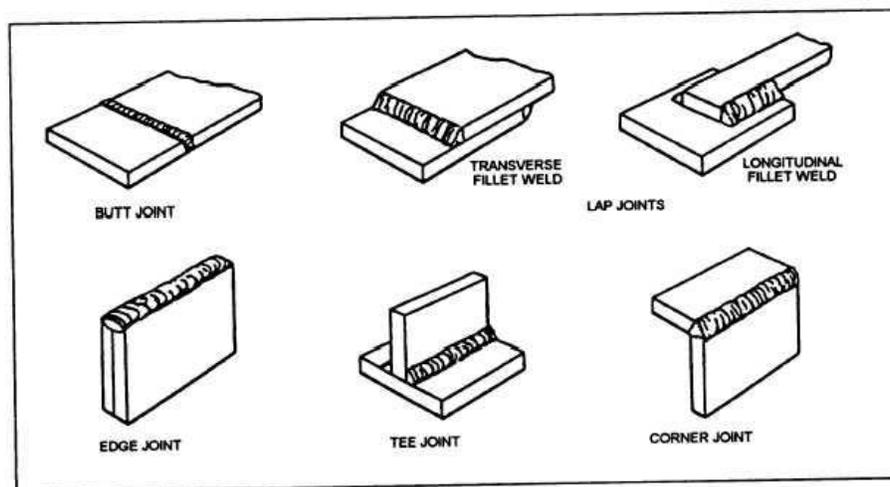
Types of welded joints ("Engineering Training and Reference Manuals.").
